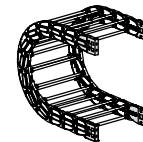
Fig. A The chain can be fixed frontally, inner or outer radius. (Fig A)
